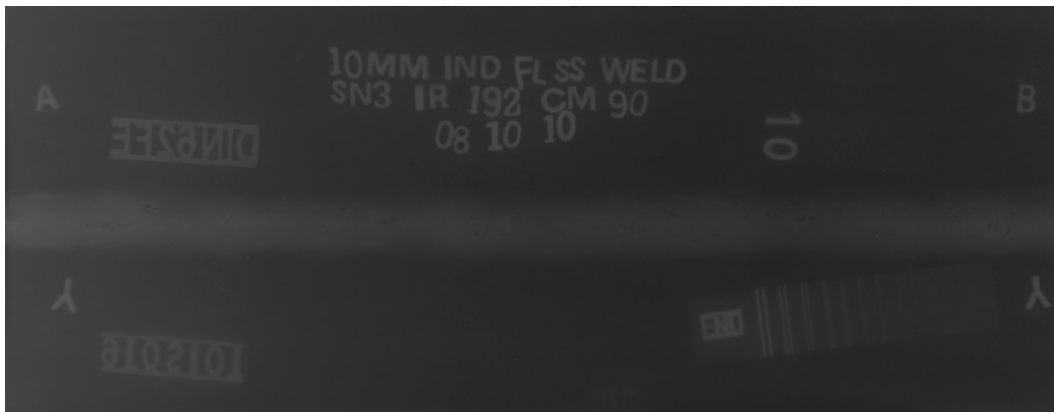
(a). Exposure of a 10 mm thick steel weld with ^{192}Ir and a digital fluoroscope.
